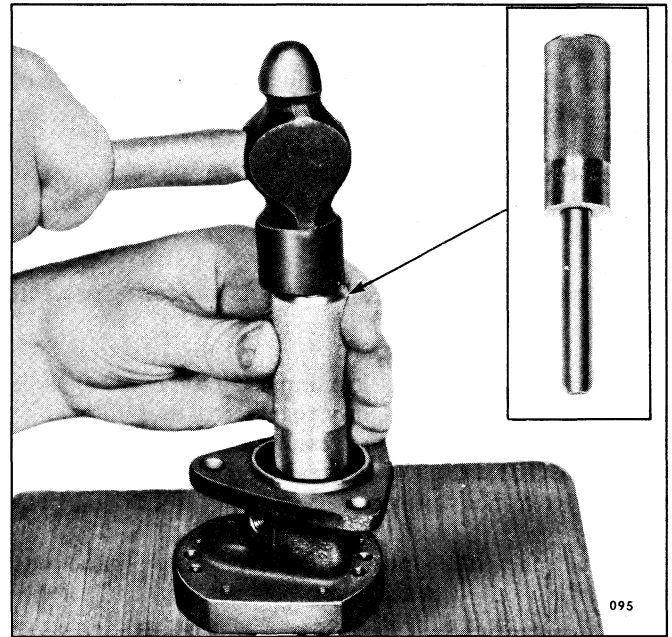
Installing Inner Oil Seal in Fuel Oil Pump Body with Tool J 1508-8
